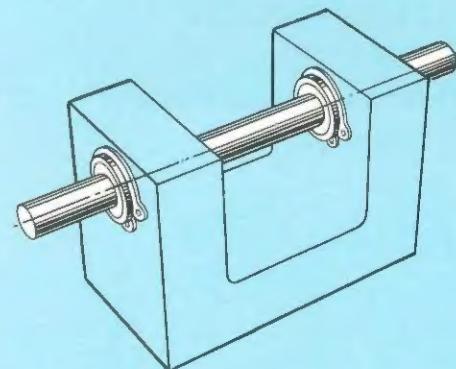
External Retaining Ring Installation BALL BUSHING may be simply retained in a Push Fit housing bore by use of either Type W or Type C external retaining rings in the retaining ring grooves on the Bushing O.D.
